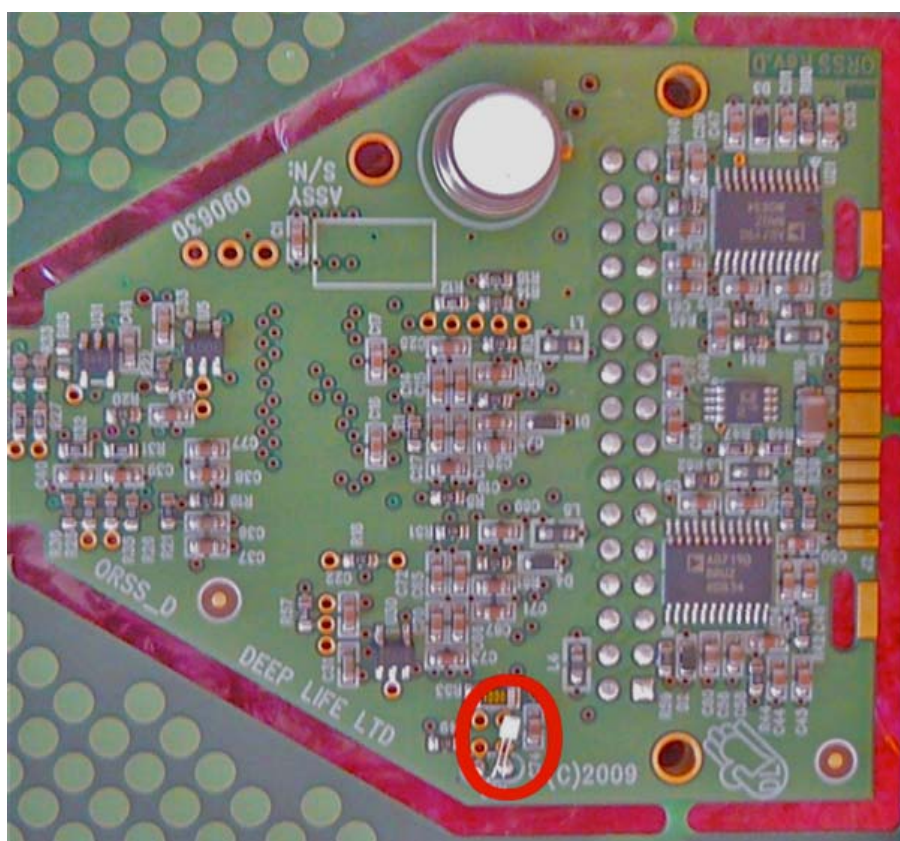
Subassembly provided by Deep Life Ltd to enable the sensor to be photographed because the sensor inside the sensor bell was not readily visible. Mounting fixture is removed to show the sensor. The platinum film resistor sensor is the small white object on leads in the bottom middle of this image, highlighted in RED.
